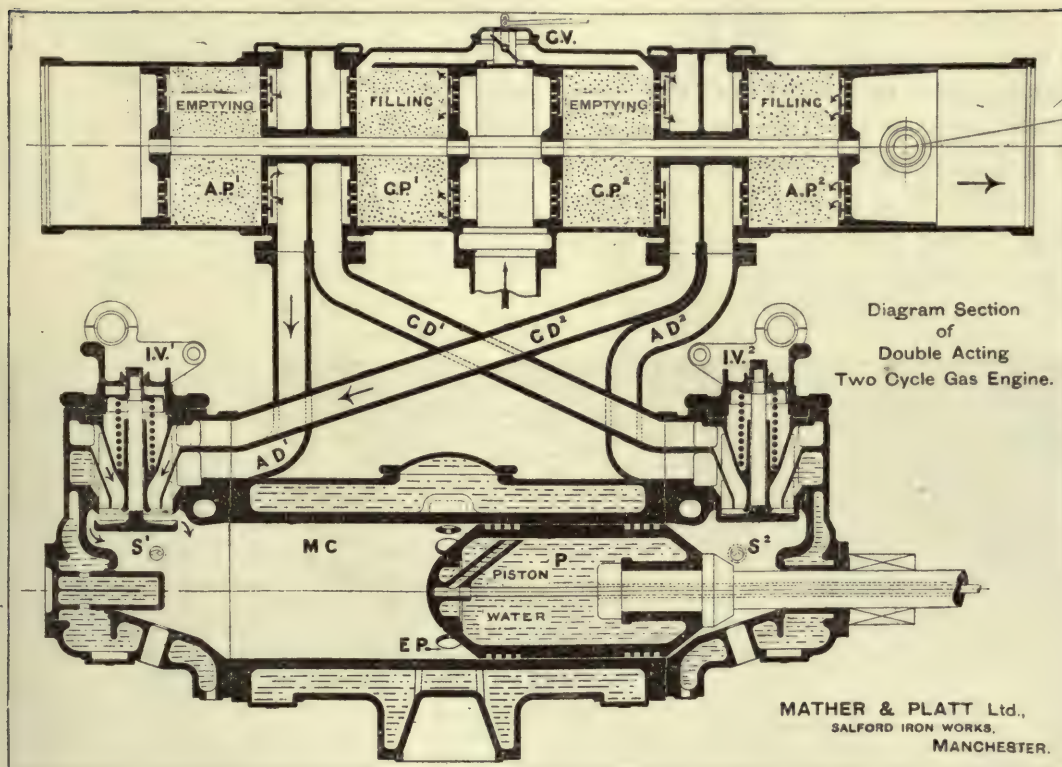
SECTION OF DOUBLE-ACTING TWO-CYCLE KÖRTING GAS ENGINE.
